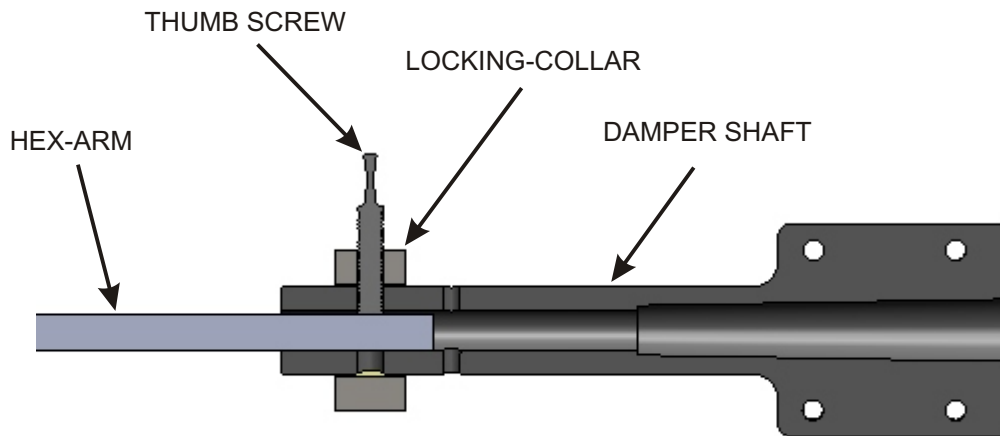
CUT AWAY VIEW OF ASSEMBLY
